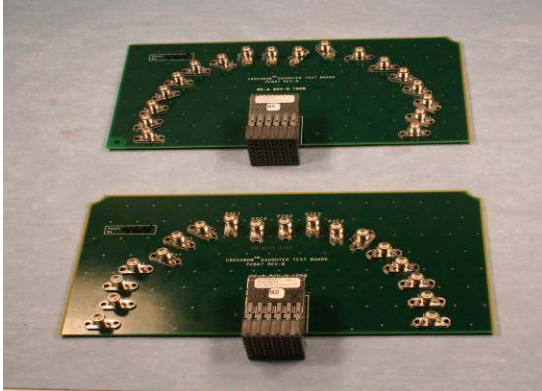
Crossbow™ daughter card test board PCB67 RevB
